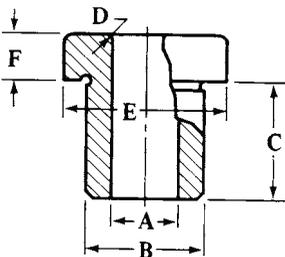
Fixed Type Renewable Wearing Bushings — Type F
